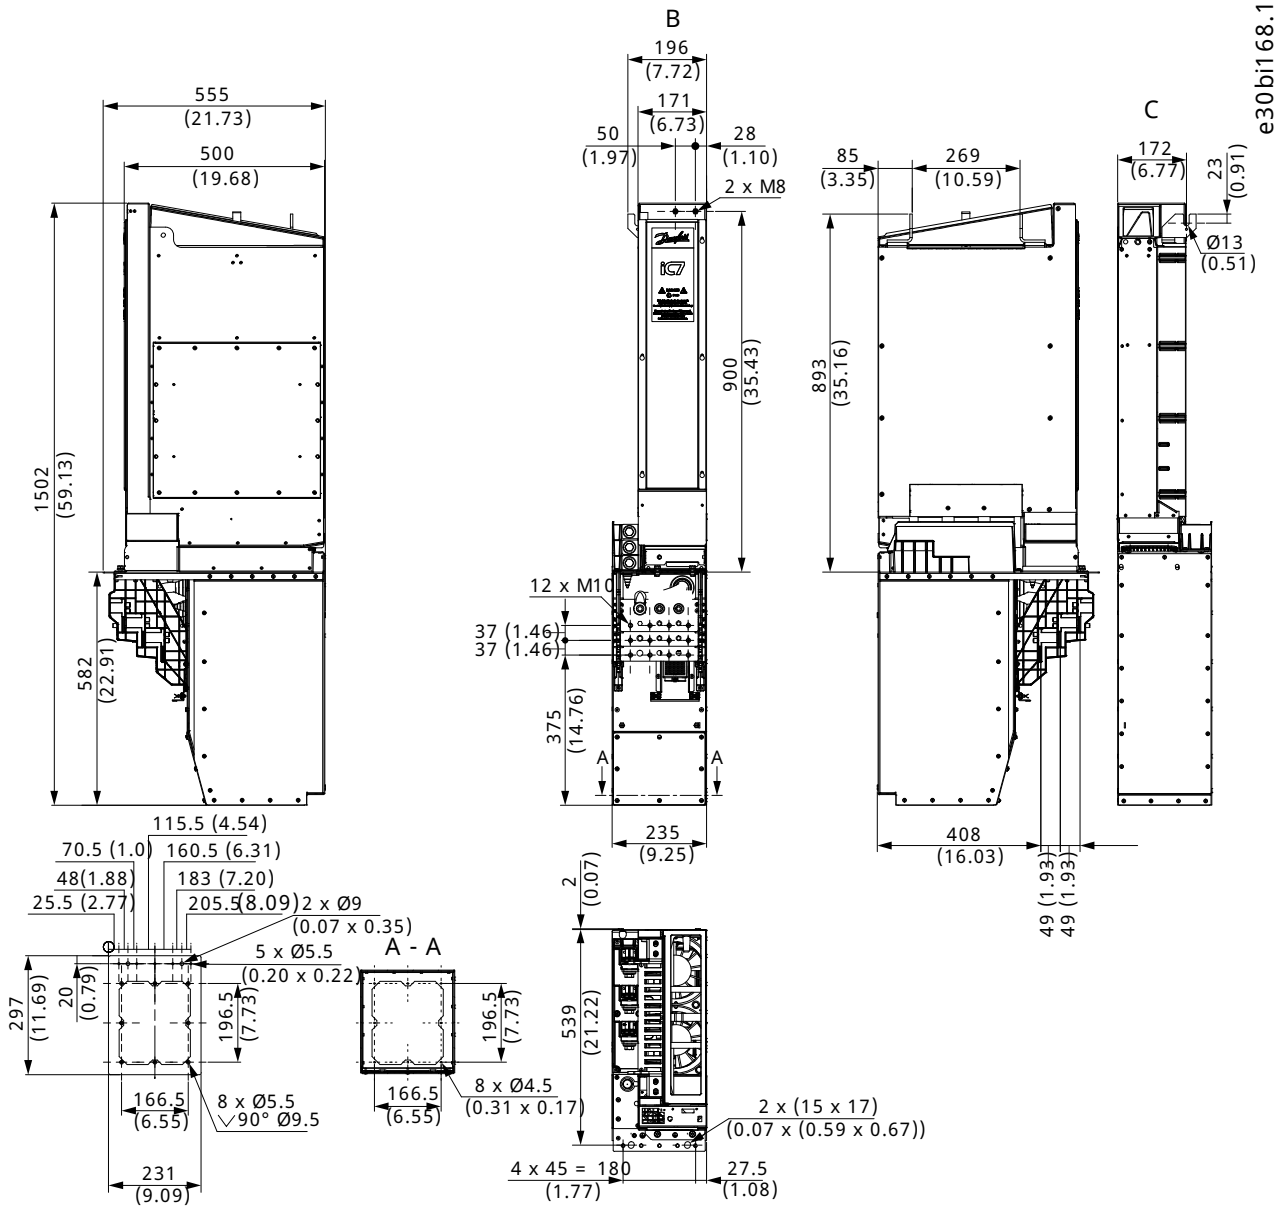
Dimensions of the Inverter Module in mm (in), IR10
